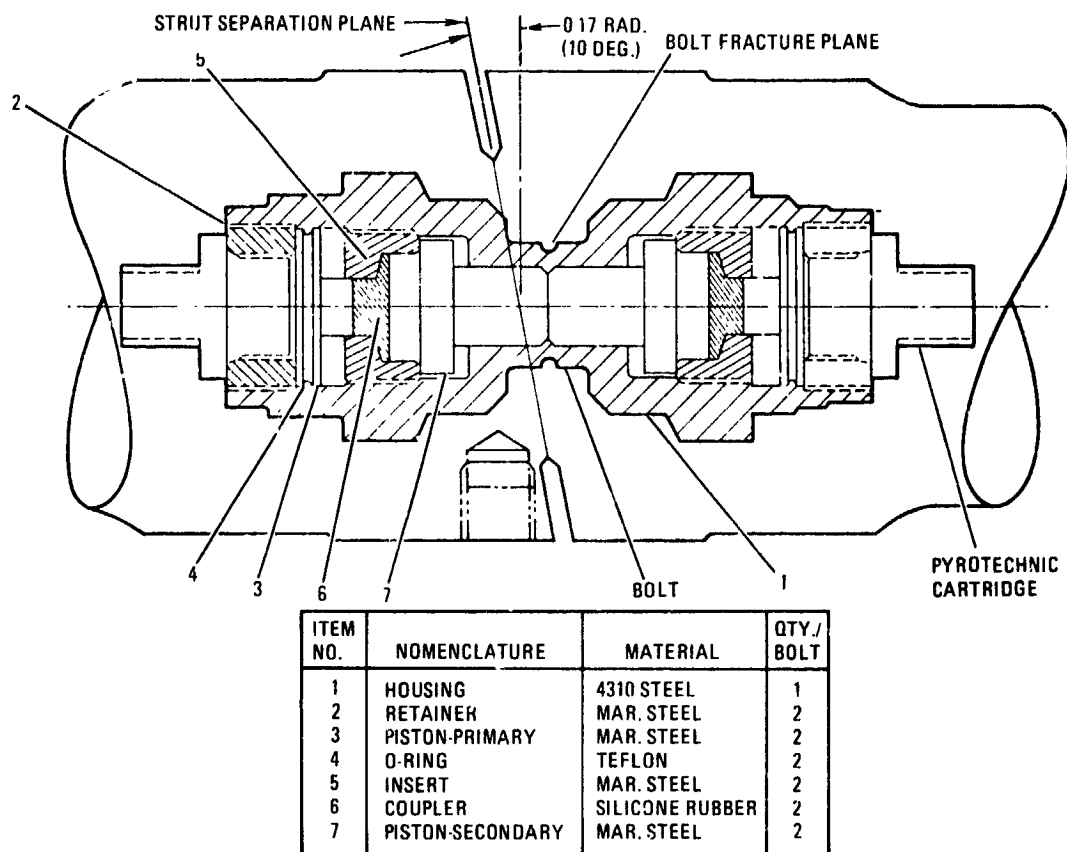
Forward bearing reactor separation bolt assembly configuration.
